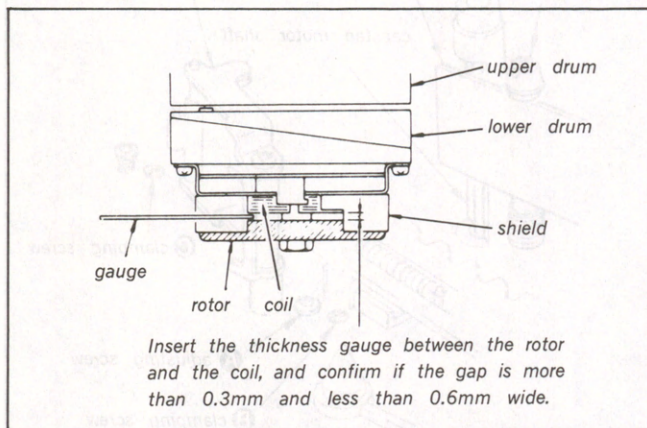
Checking the motor gap when replacing the drum assembly.
